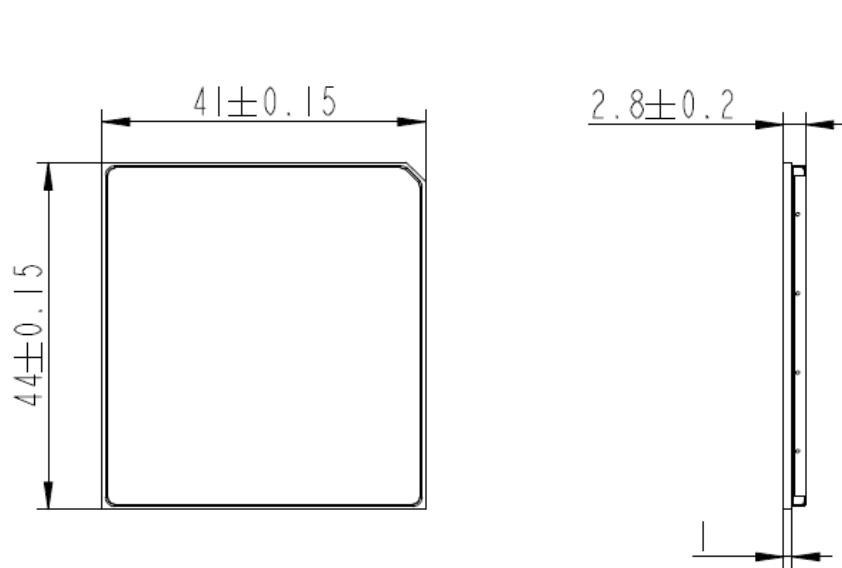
Top and Side Dimensional Drawing (Unit: mm)
